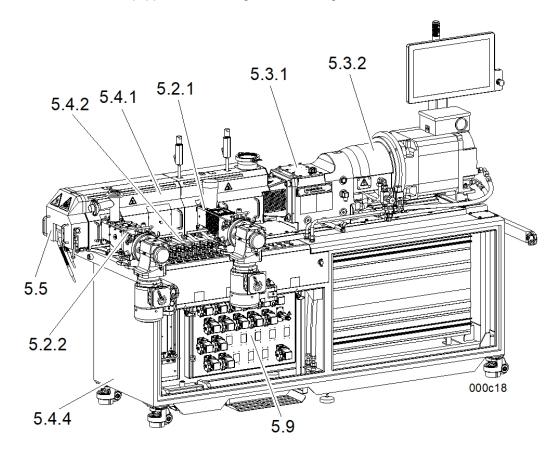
Laboratory machine (item numbers in accordance with the following chapters)
